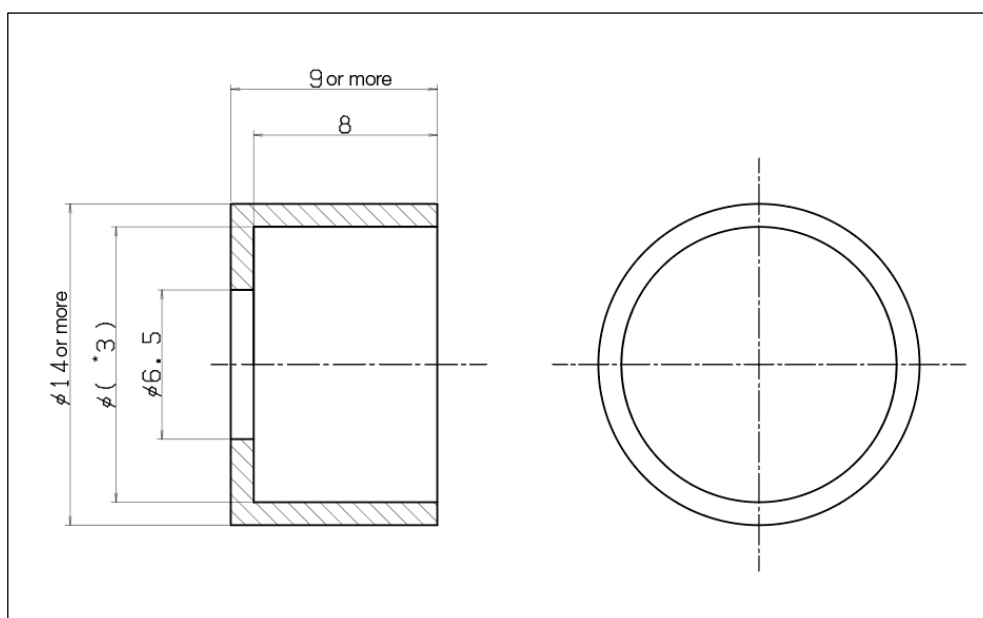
Design 2-2 of Wide Metal Housing One-Way Clutch Fitting Section
